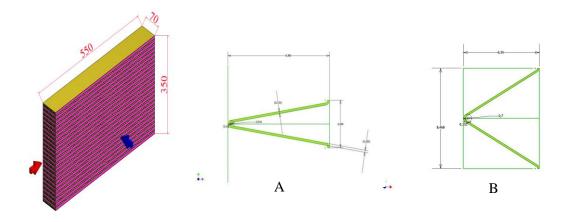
Designed intercooler with the fins on the air (A) and the gas (B) party appearance
